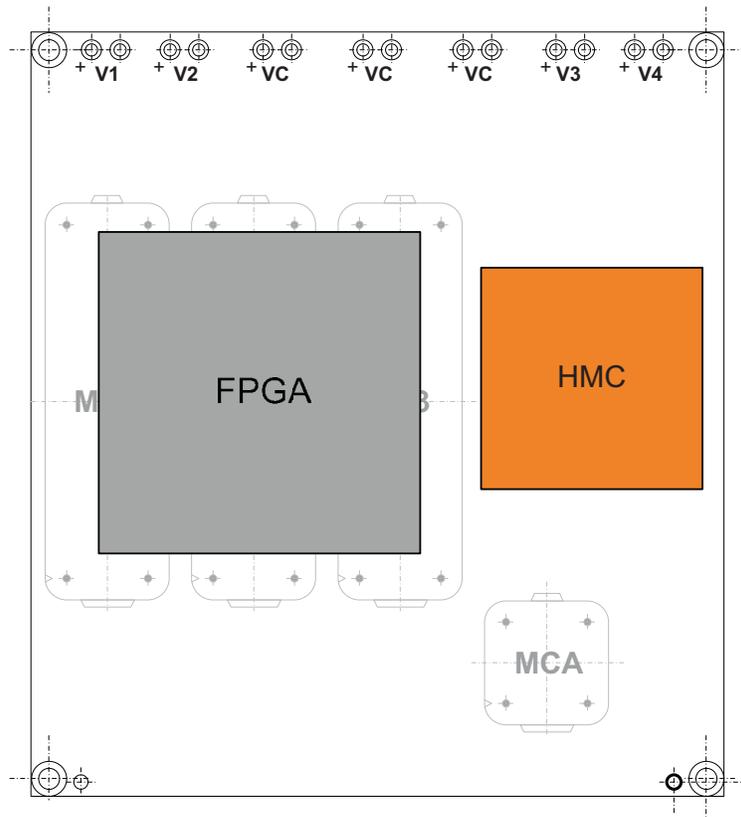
Notional PCB layout showing only the 45x45 mm FPGA and 31x31 mm HMC devices.
